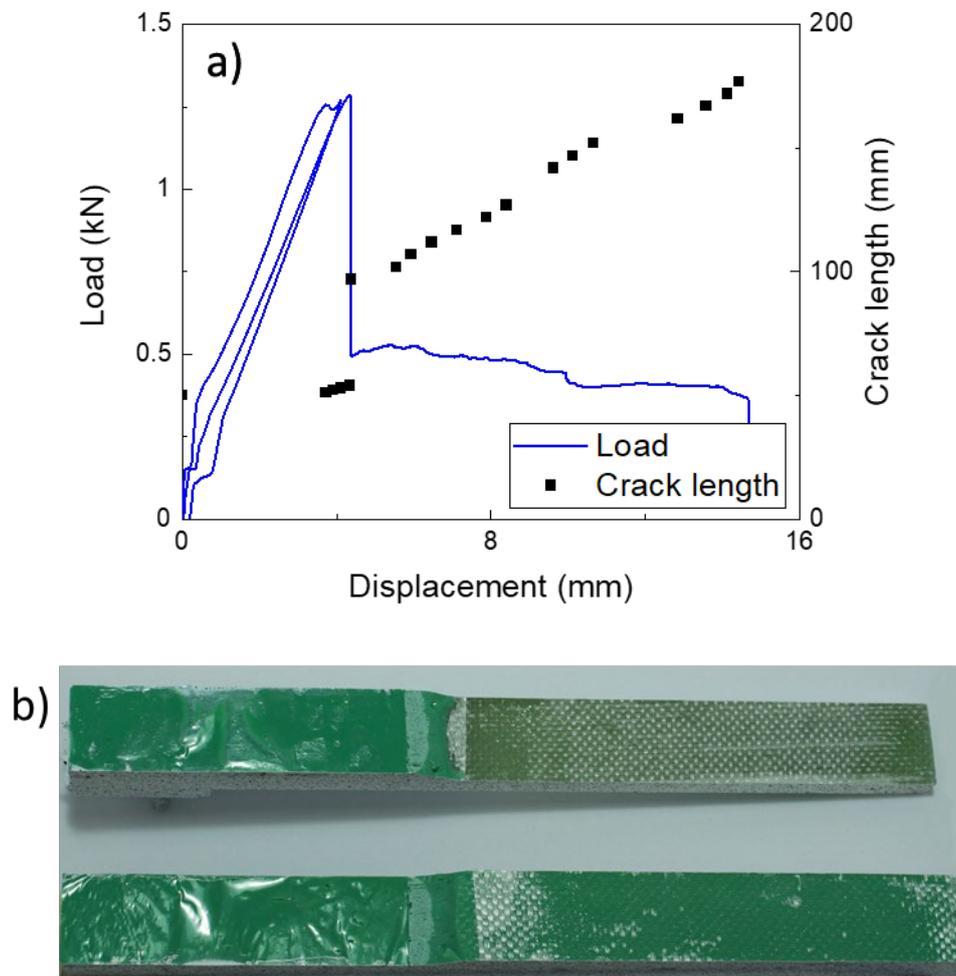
DCB joint with 12mm thick adhesive layer: a) load-displacement curve and b) fracture surface.
